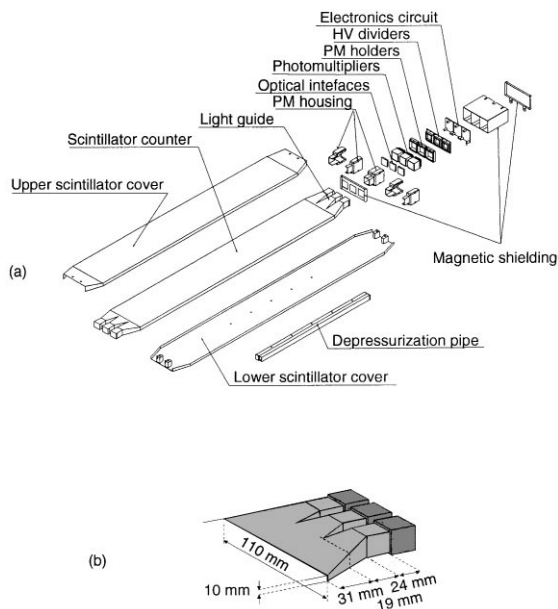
(a) Exploded view of one TOF module assembly; (b) design of the light guide.
